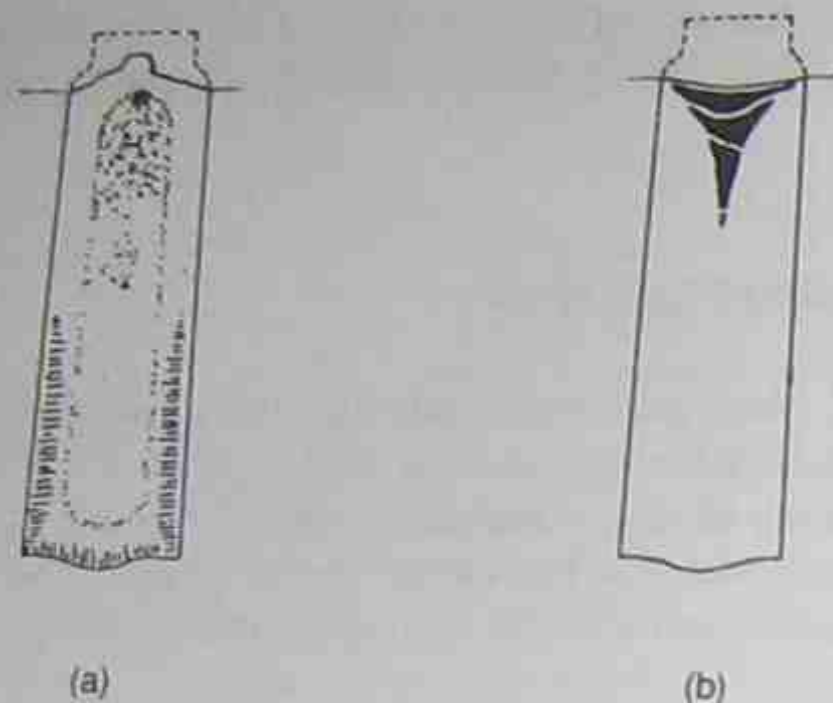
Sketch of the cross sections of ingots made from (a) rimmed and (b) killed steels.
